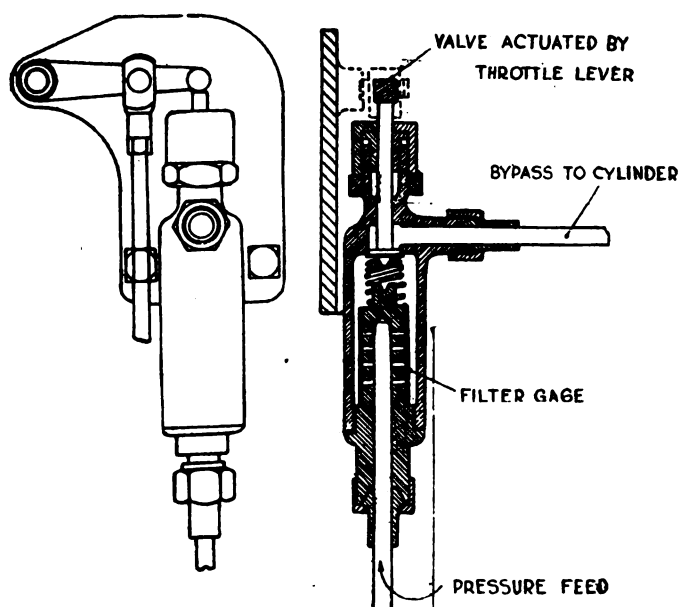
Rolls-Royce throttle-controlled oil feed to cylinders.
